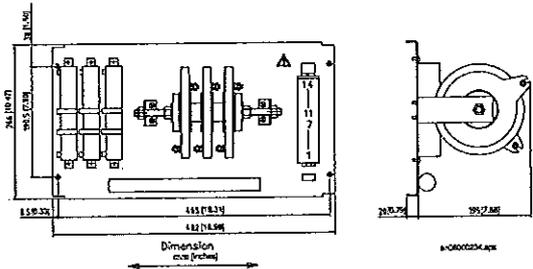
Dimension drawing of a three phase high impedance resistor unit
